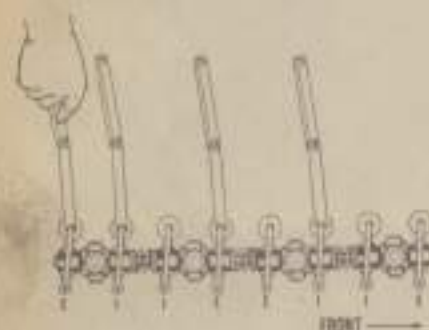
A—All non-diesel models. With number 4 piston at TDC on compression stroke, valve clearances (tappet gap) can be set on the four valves indicated. Refer also to Fig. 32.
